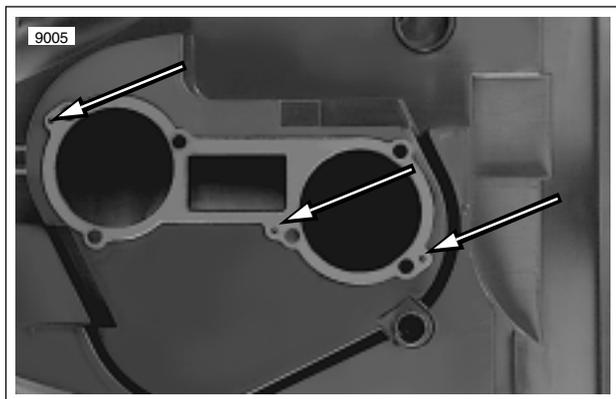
Air Filter Gasket Alignment Pins (3)
